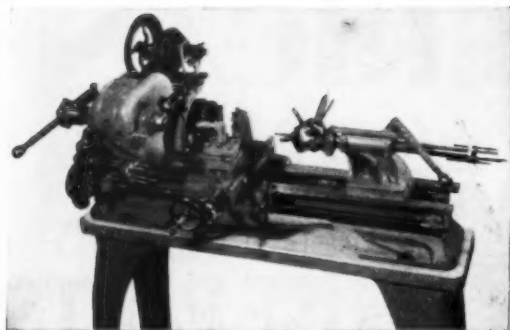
A small bench lathe relieved of its regular duties and "dressed up" with turret lathe attachments.
